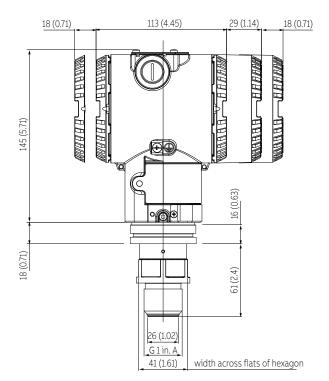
$\,\,$ 266HRH / 266NRH with barrel housing and direct mount seal S26KN pulp and paper 1 in. Gas threaded connections
